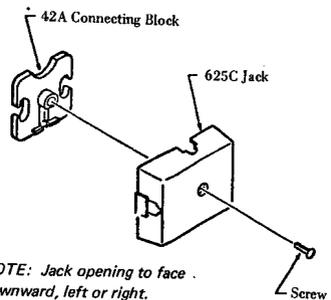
Conversion of 42A Connecting Block Using 625C Jack
